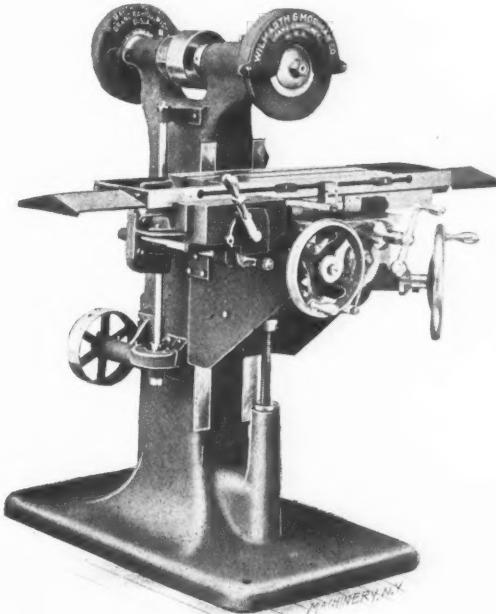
Front View of the Wilmarsh & Morman No. 2 Surface Grinder.
